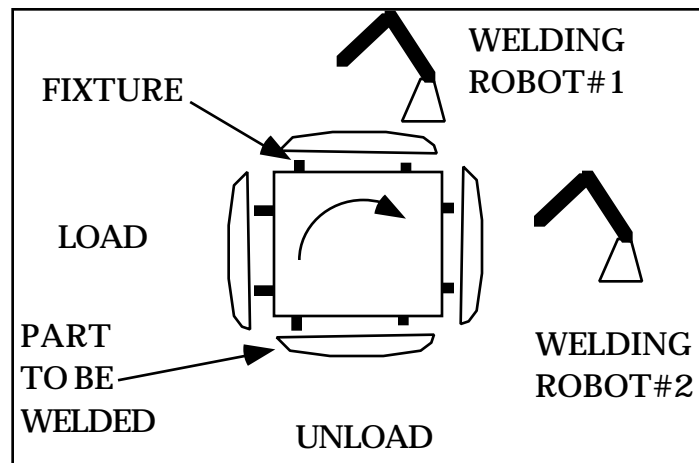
Sketch of 4-sided Welding Station for Car Parts Designed Using CATIA Plus Drawing and Library Functions Created by Chrysler
